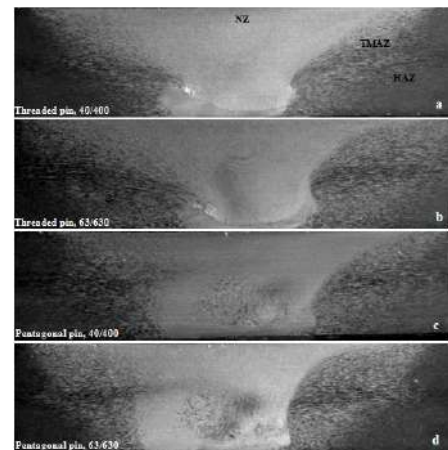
Macro-structure of nugget zone for each welding and demonstration of TMAZ, HAZ
